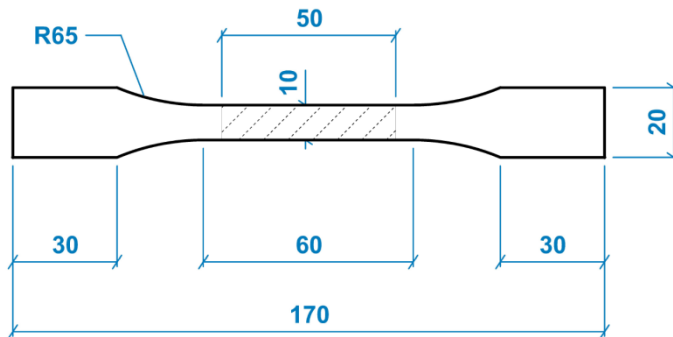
Geometry and nominal dimensions (in mm) of the dog bone-shaped specimens prepared for quasi-static uniaxial tensile testing of RTM6 and Redux 322, following the standard (EN ISO 527-2).
